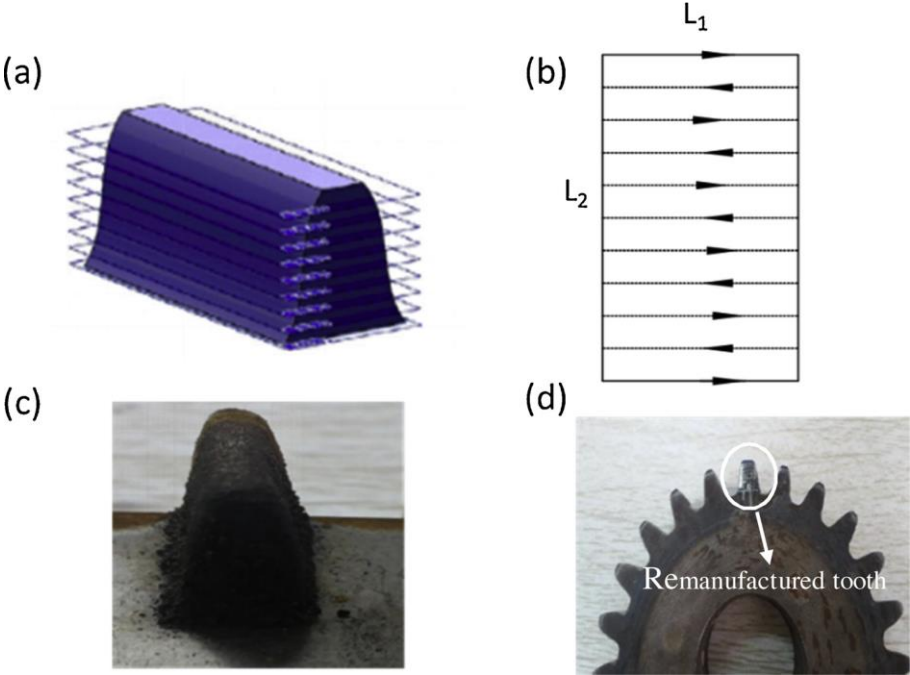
Broken gear repairing process: (a) model of the broken tooth, (b) the cladding strategy of the first layer, (c) remanufactured tooth, (d) gear after post-processing [76].
